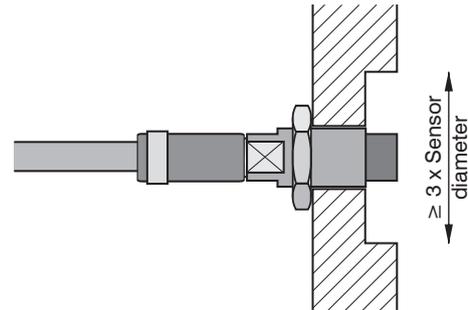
Flush mounting of an unshielded sensor in a metal holder.
